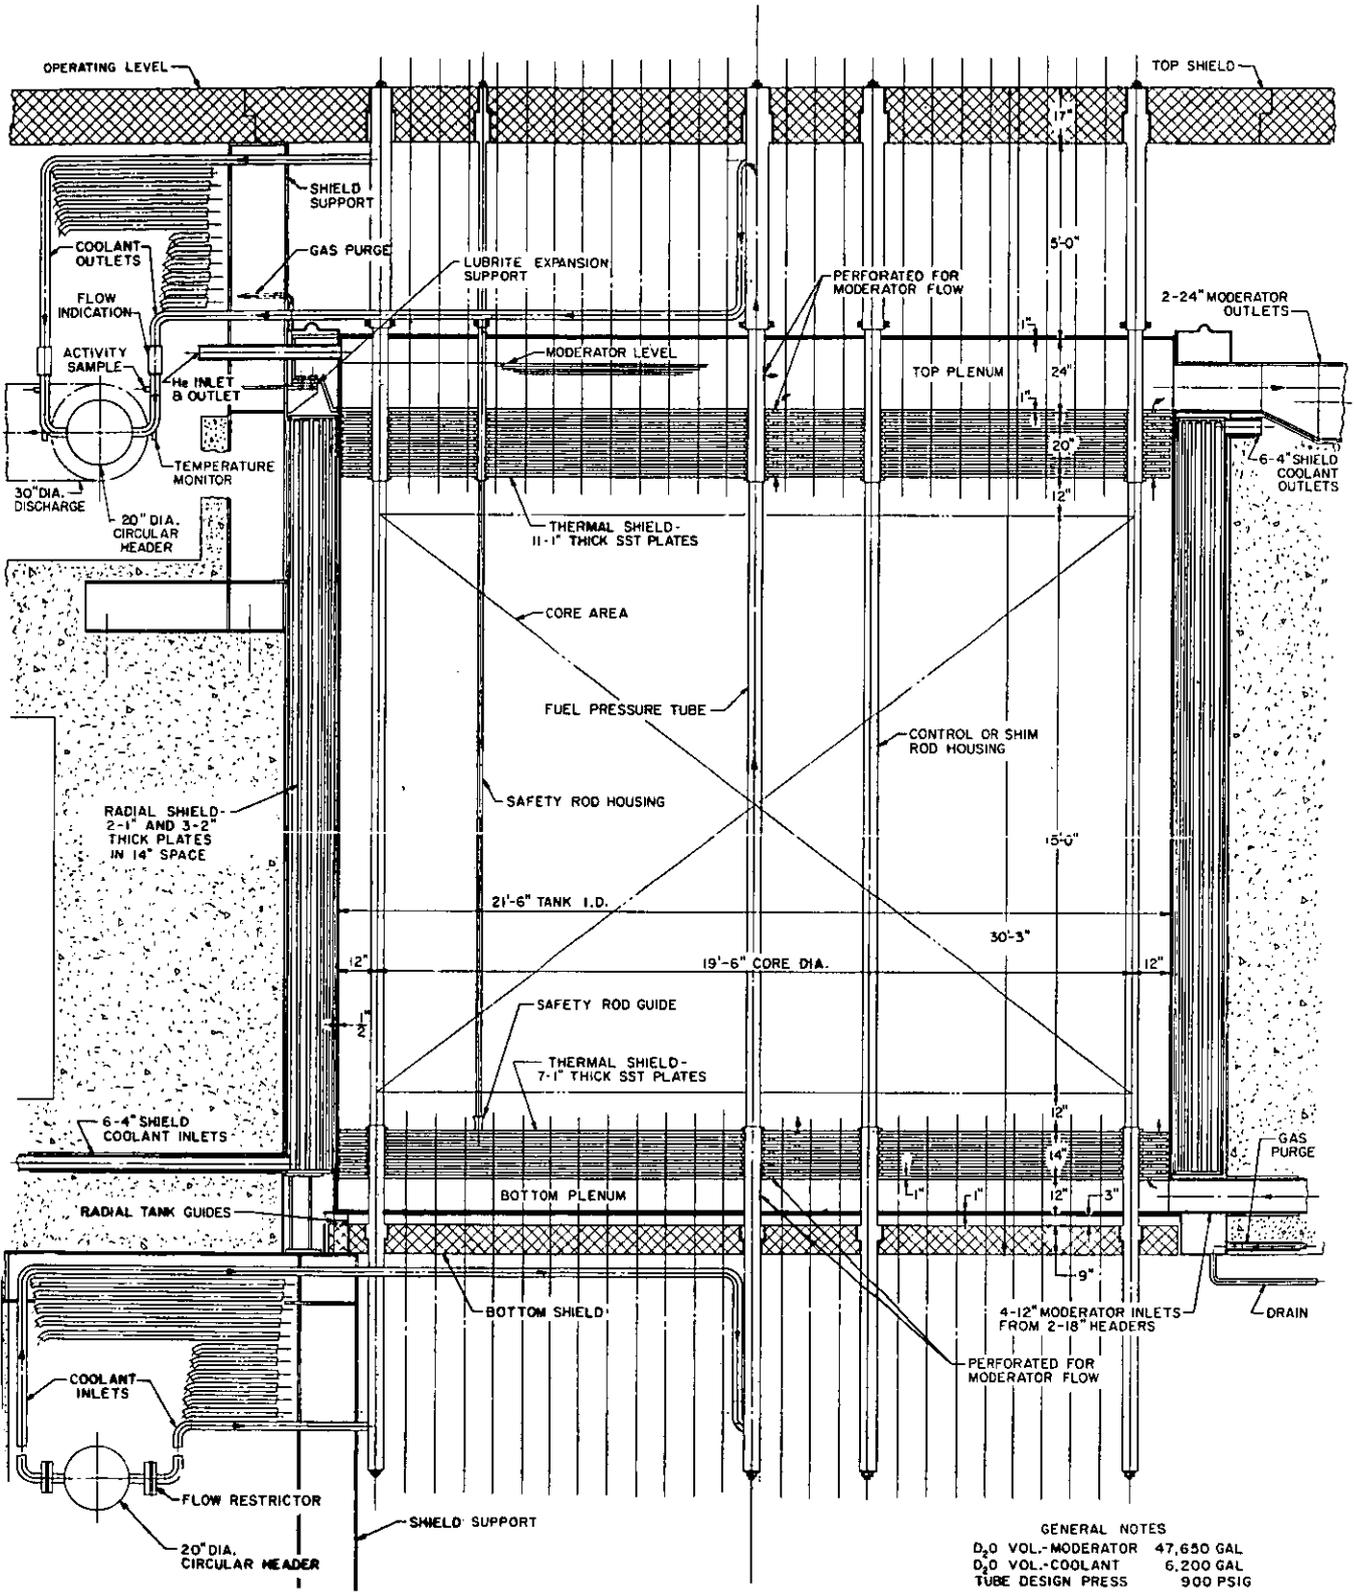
PRESSURE TUBE REACTOR - BOILING D₂O COOLED - COLD MODERATOR
